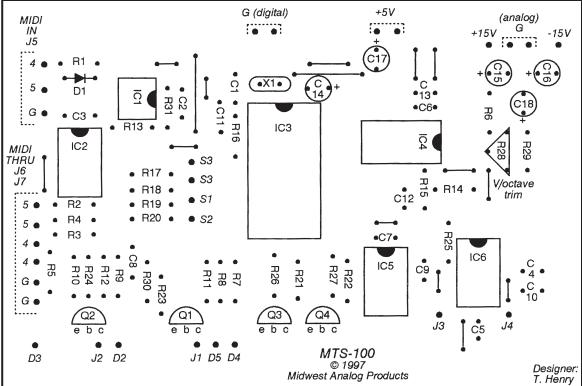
The MTS-100 Circuit Board Parts Placement Guide There are 15 jumpers. Each is represented as a solid line connecting two points.
